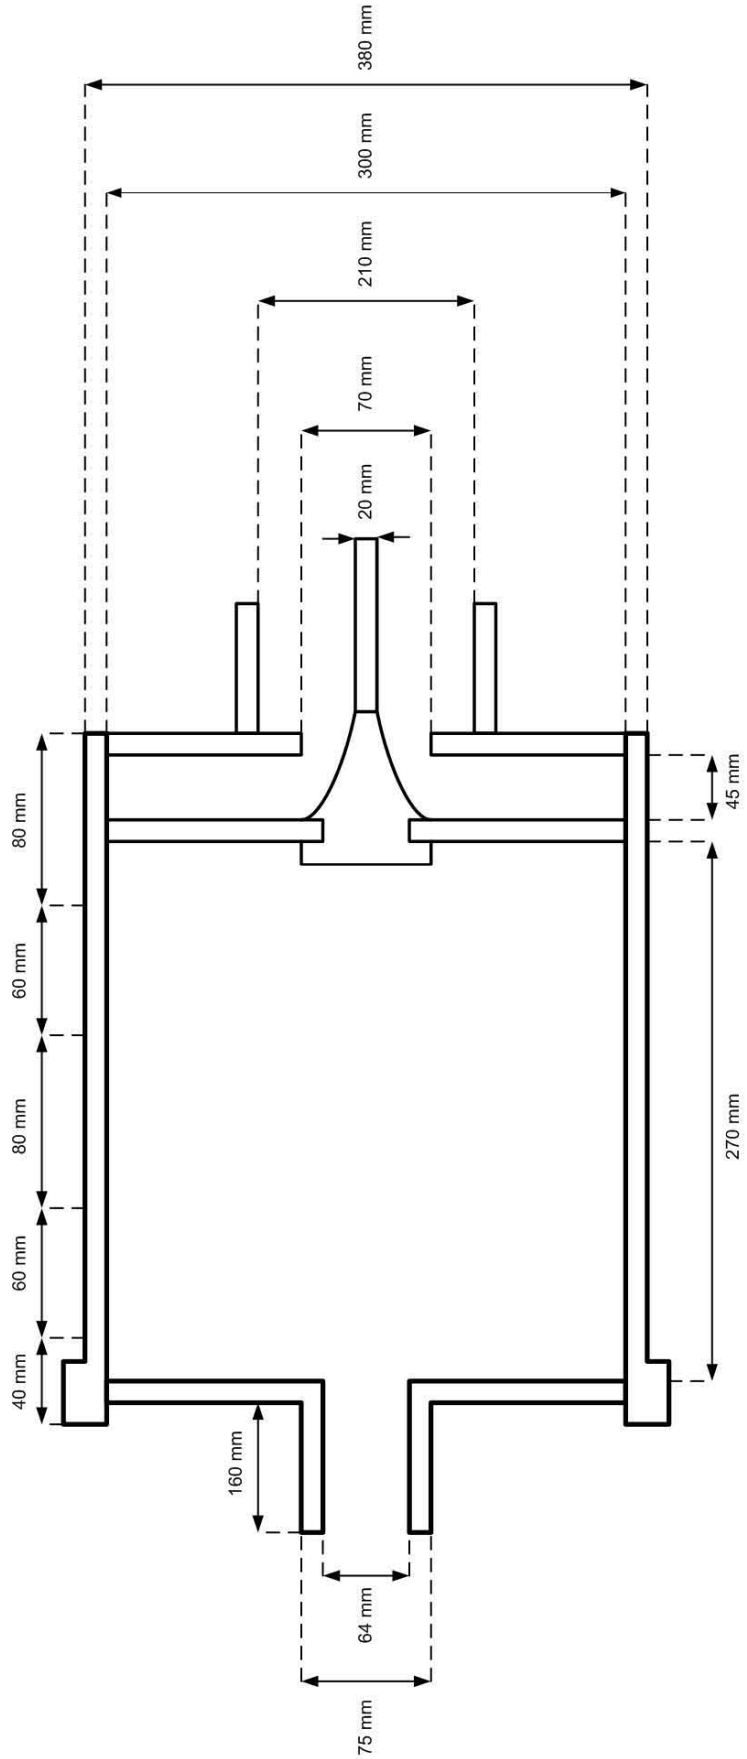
A schematic of the old 300mm mill with dimensions.
